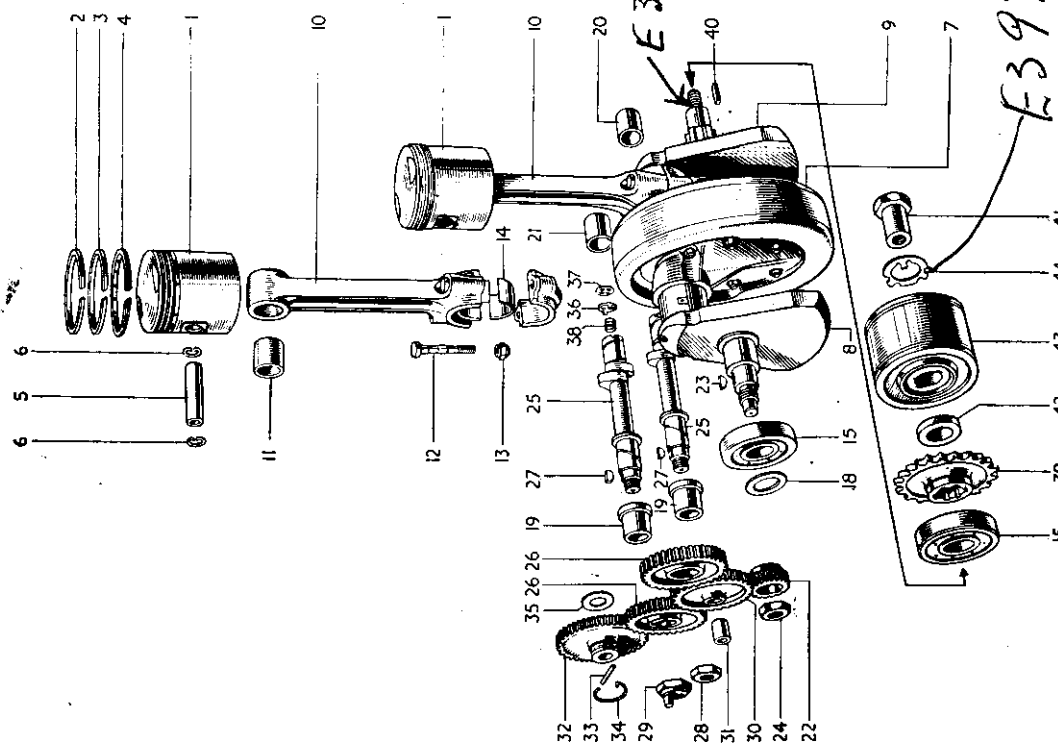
CRANKSHAFT, CONNECTING RODS, PISTON TIMING GEAR, etc.
